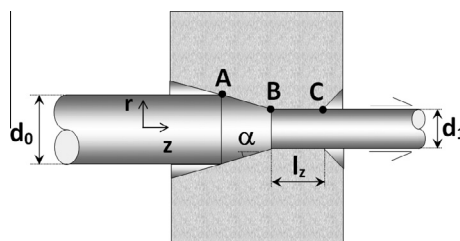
Conventional wire drawing (constant die angle): single diameter reduction during drawing.
